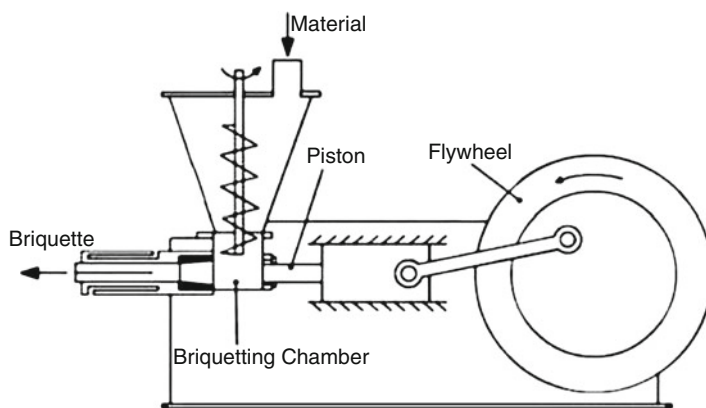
Schematic view of a piston press briquetting machine (<https://www.slideshare.net/sanjay0313/briquetting-248822750>)
